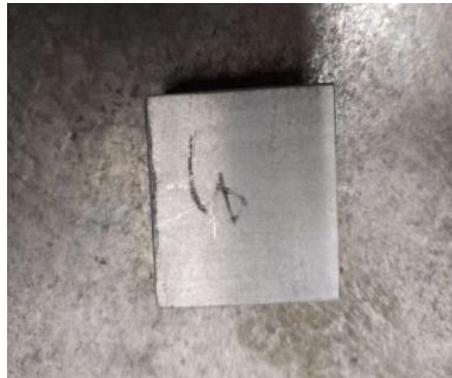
EN-24 work piece before machining (30x28x28 mm²)
